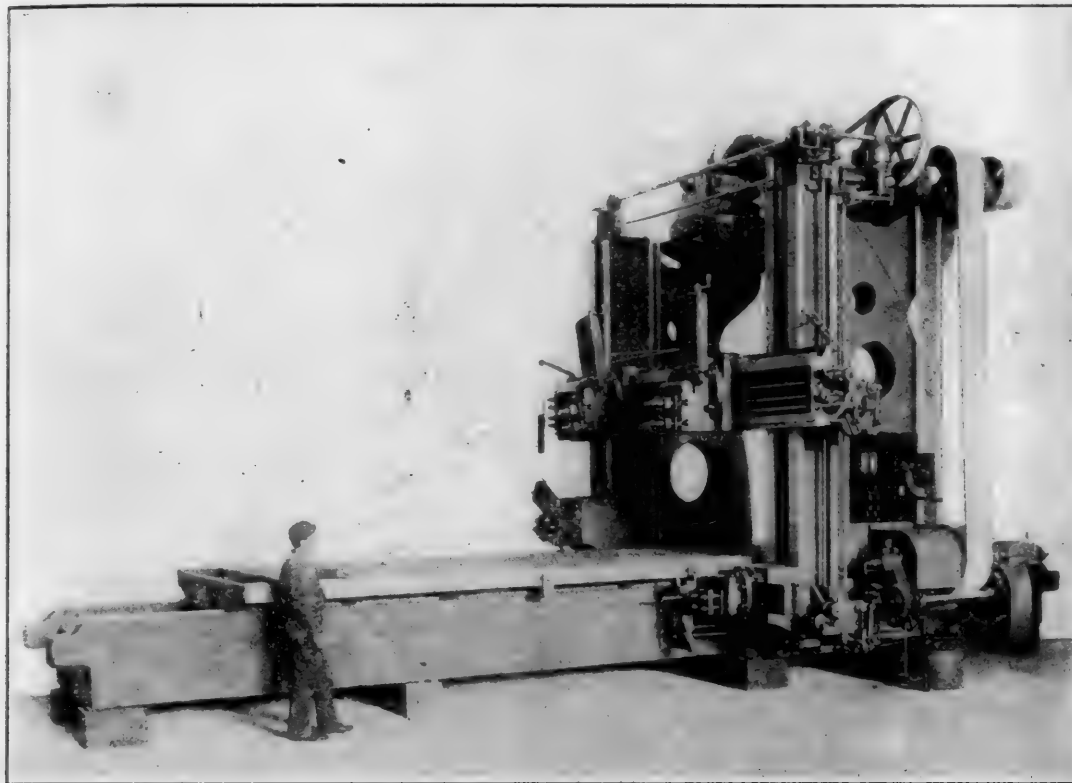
SELLERS' PLANER, WITH PNEUMATIC REVERSING MECHANISM.
